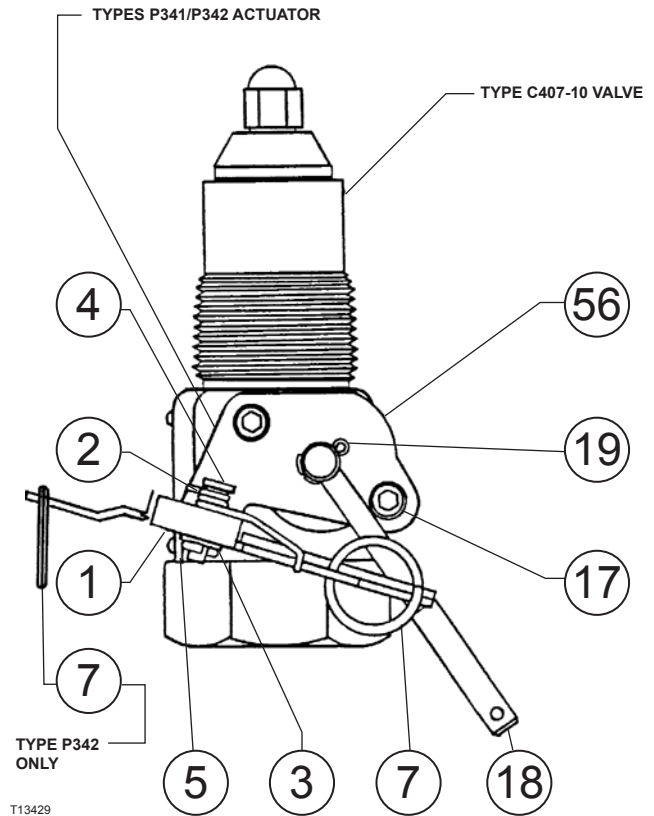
Type P341 or P342 Installed in Type C407-10 Internal Valve
